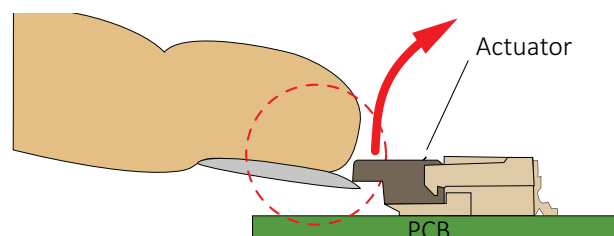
Opening 22-pin FFC flip connectors on adapter boards
